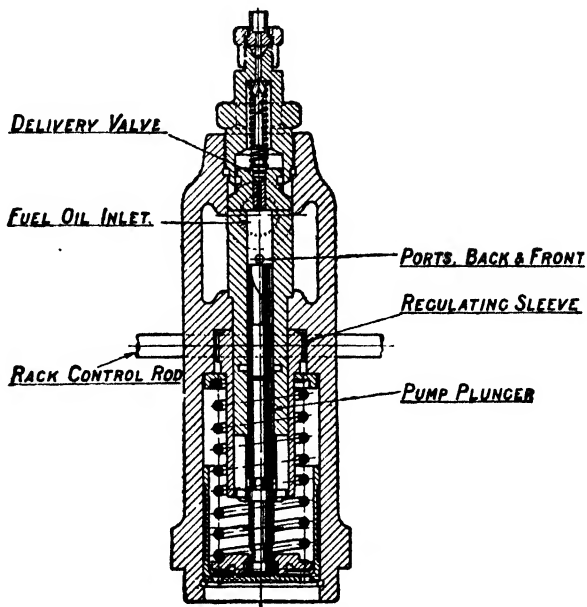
THE B. & M. FUEL-INJECTION PUMP
